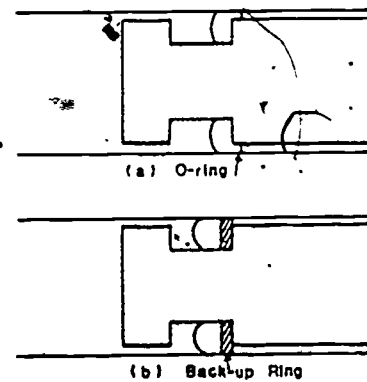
Back-up Ring Prevents Extrusion of O-Ring.
